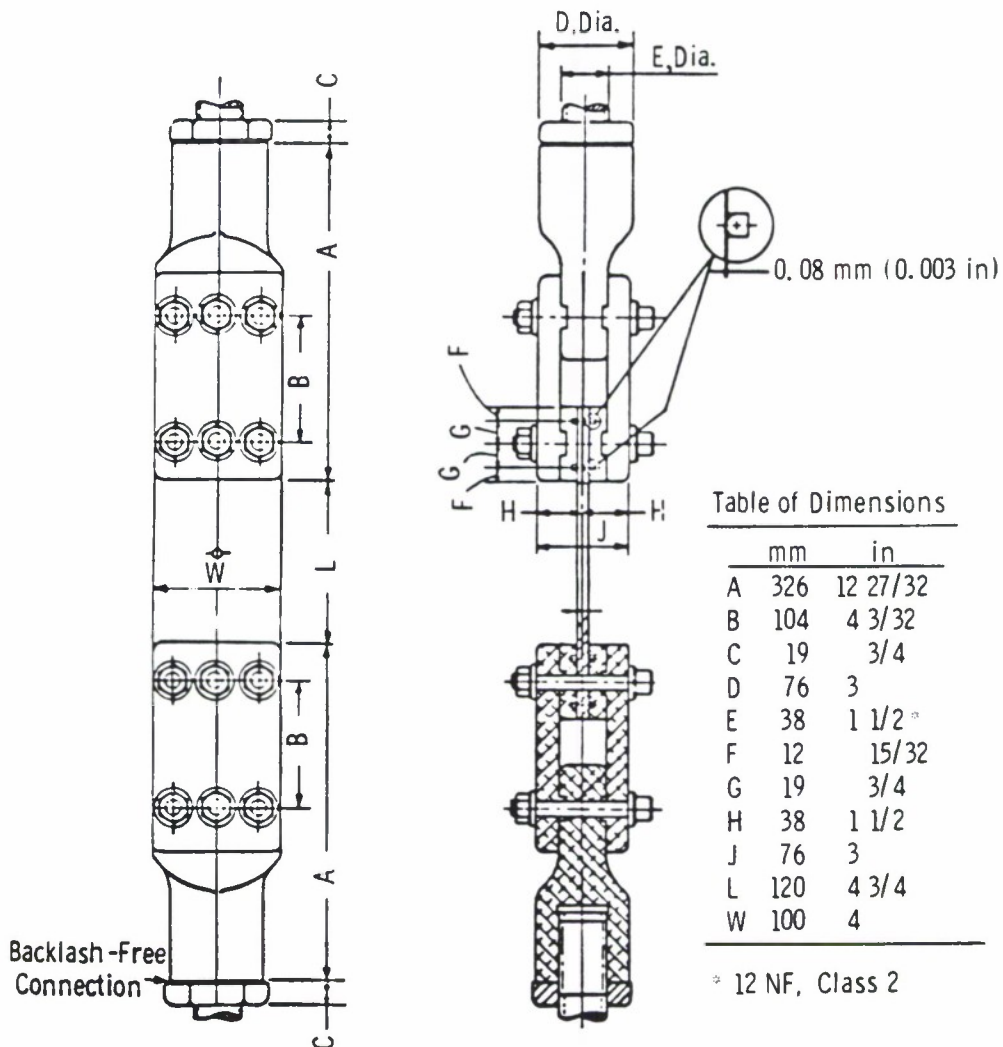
Example of Bolt and Keyway Assembly for Gripping 100-mm (4-in.) wide CCT Specimen
